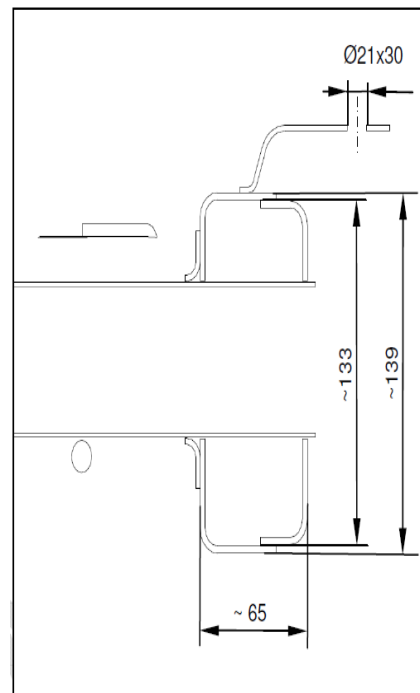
Section R-R (Amarok SC/DC)
